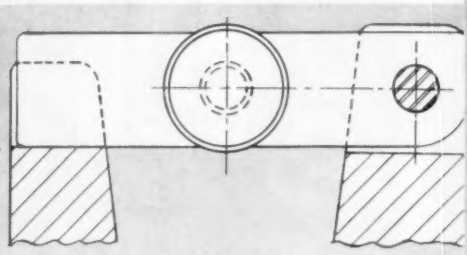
Swinging clamp in which the arm is pivoted between two ears and reduced on one side for the purpose of clearance.
